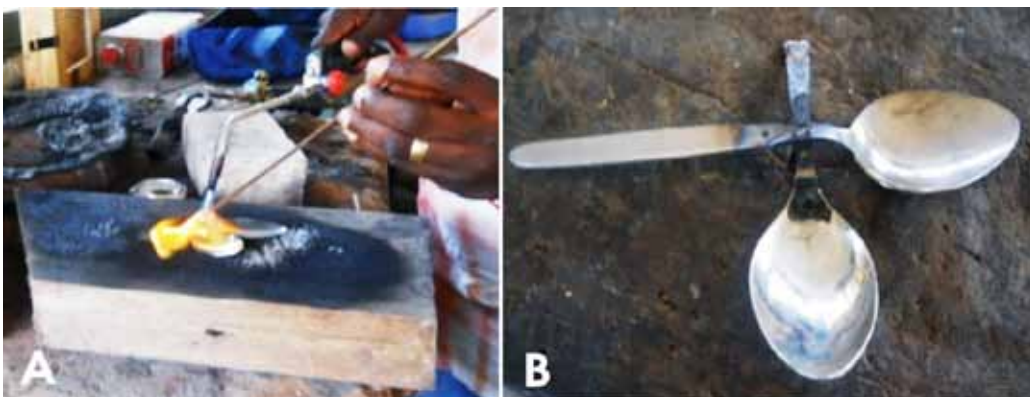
Brazing of stainless-steel spoons using brass brazing rod (A), soldered stainless-steel spoons using silver solder (B).
